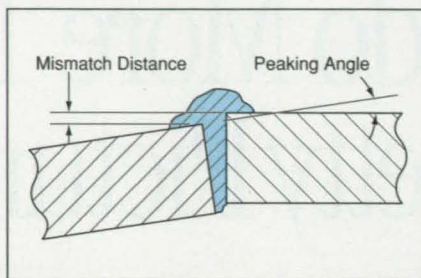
Mismatch and Peaking are the principal measures of misalignment between welded workpieces.
